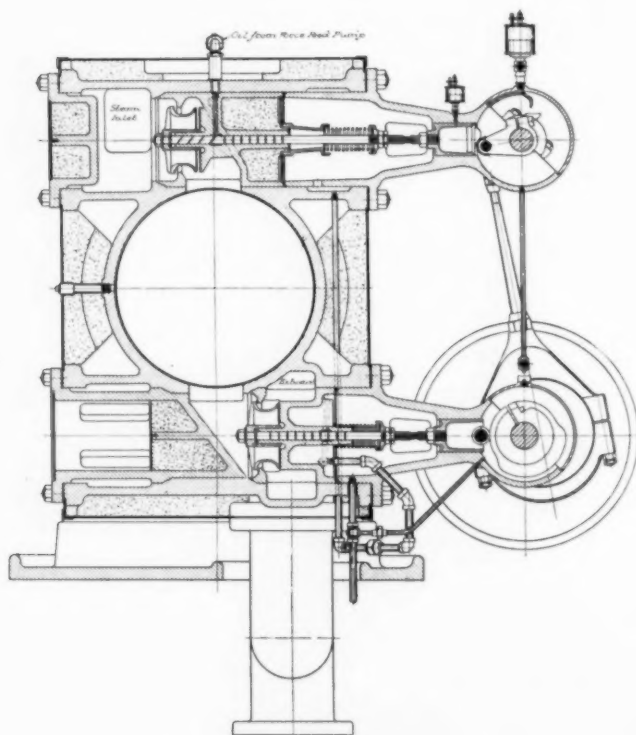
STEAM VALVES AND VALVE MECHANISM
